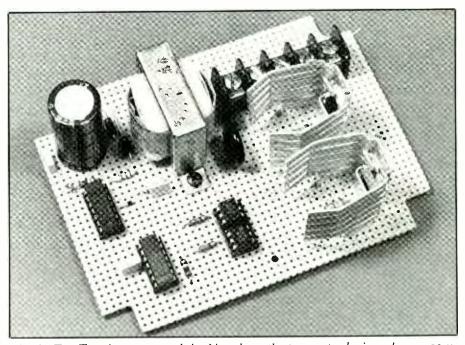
The Touchmaster module. Note how the two opto devices share a common 14-pin socket. The screw-terminal barrier strip could be replaced with solder pins instead. Note also the MOV spike-suppressor (black disc near transformer) used on this prototype to prevent false switching from line transients.
